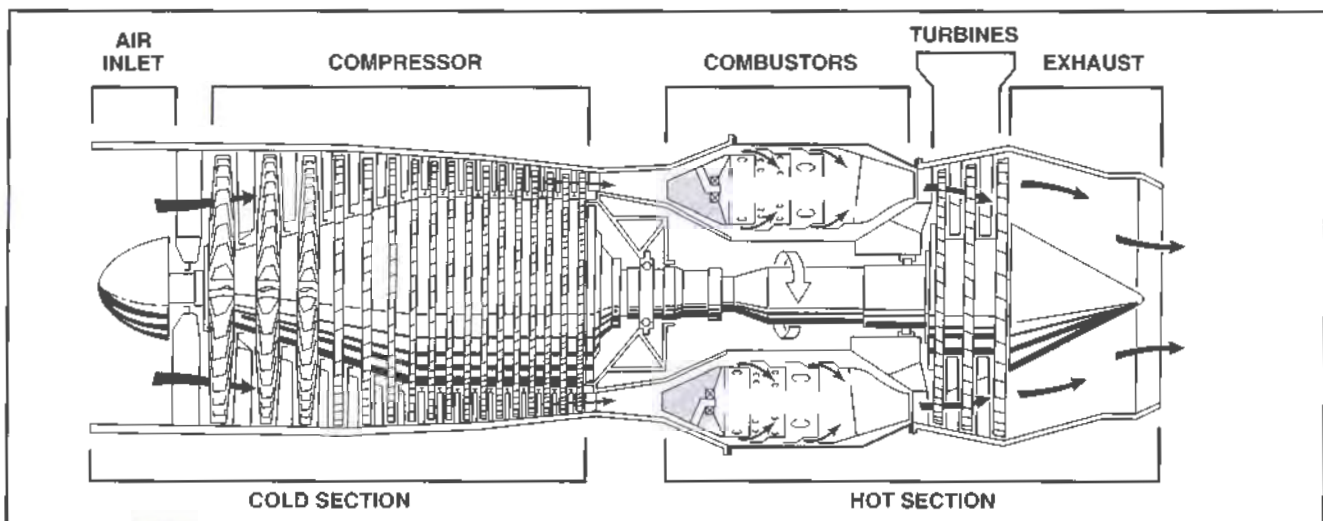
The basic components of a gas turbine engine include the air inlet, compressor, combustors, turbines, and exhaust section. The air inlet and compressor section are sometimes referred to as the engine's cold section. The combustors, turbines, and exhaust section are sometimes referred to as an engine's hot section.
